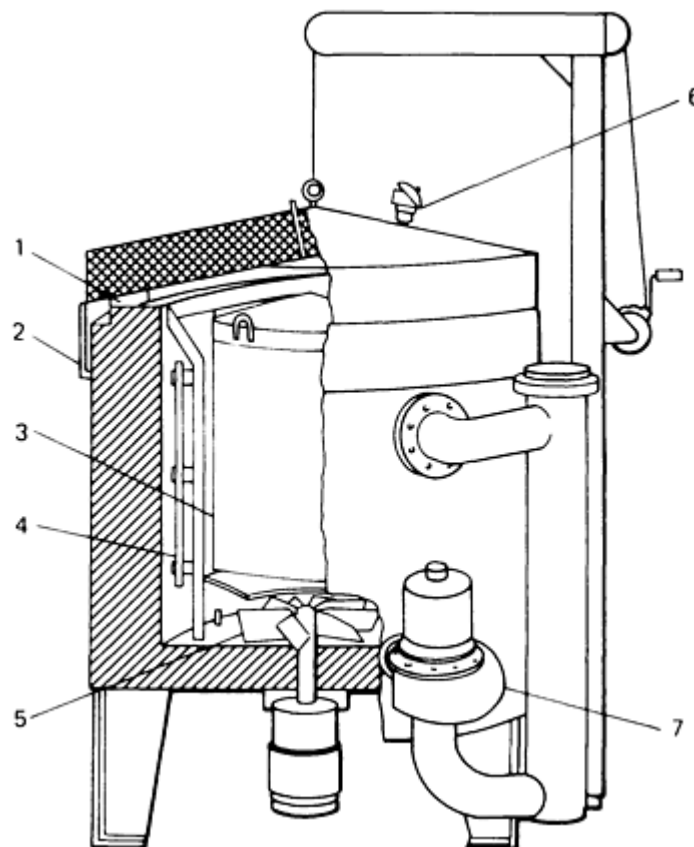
Vertical retort nitriding furnace. 1, gasket; 2, oil seal; 3, work basket; 4, heating elements; 5, circulating fan; 6, thermocouple; and 7, cooling assembly. At end of cycle, a valve is opened and fan (not shown) incorporated in the external cooler circulates atmosphere through the water-jacketed cooling manifold.
